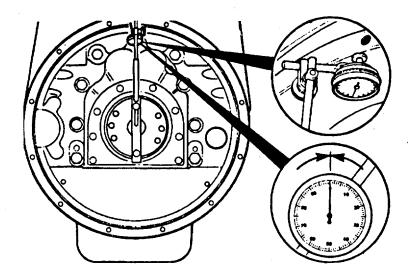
Attaching Dial Indicator to Crankshaft.
